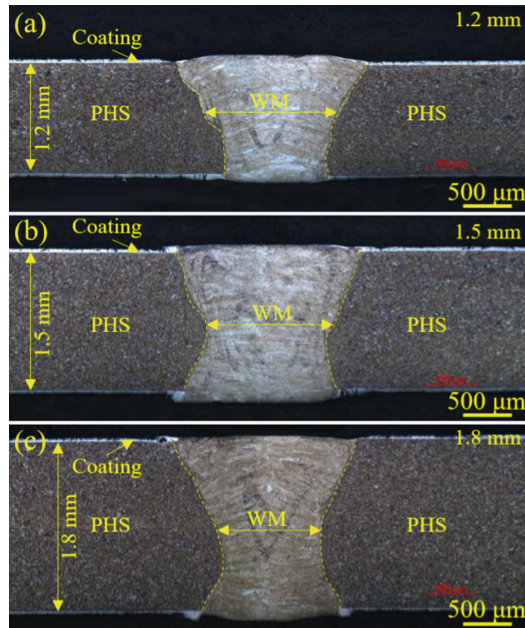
The macrostructure of the laser welded joints with various thickness of steel sheets: (a) 1.2 mm, (b) 1.5 mm, and (c) 1.8 mm.
